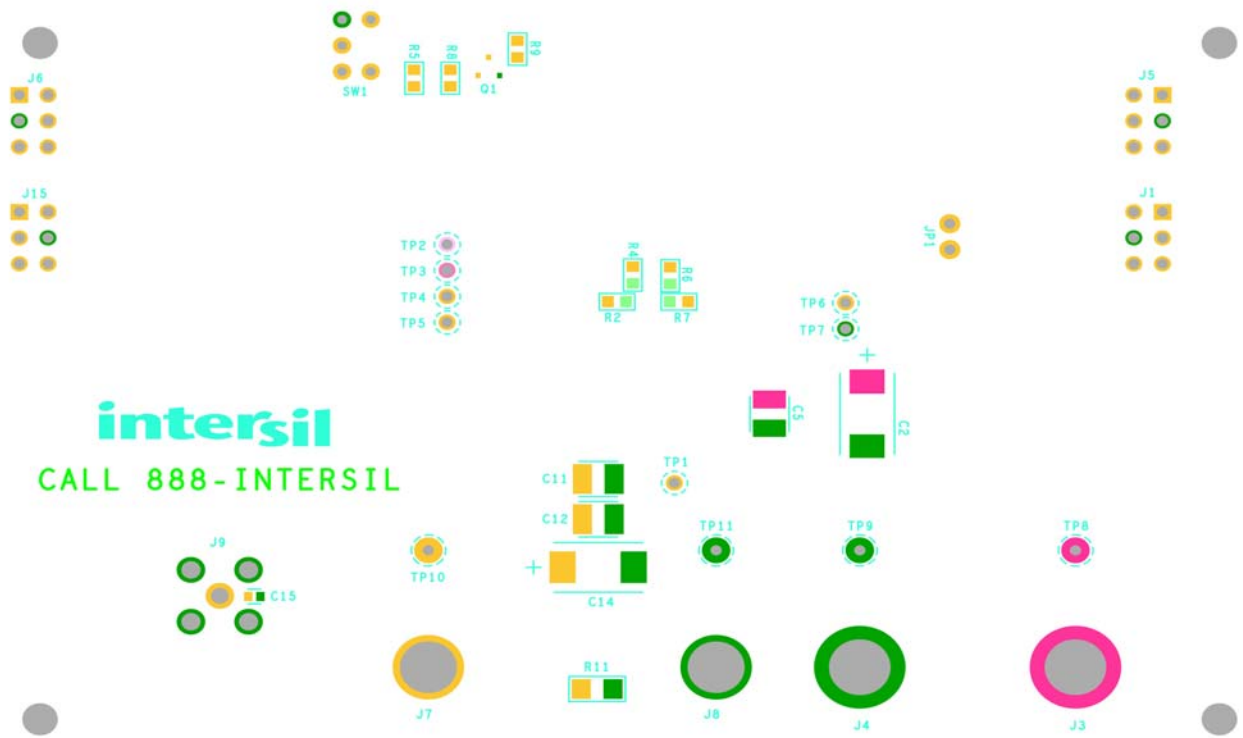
PCB - BOTTOM LAYER (BOTTOM VIEW)
